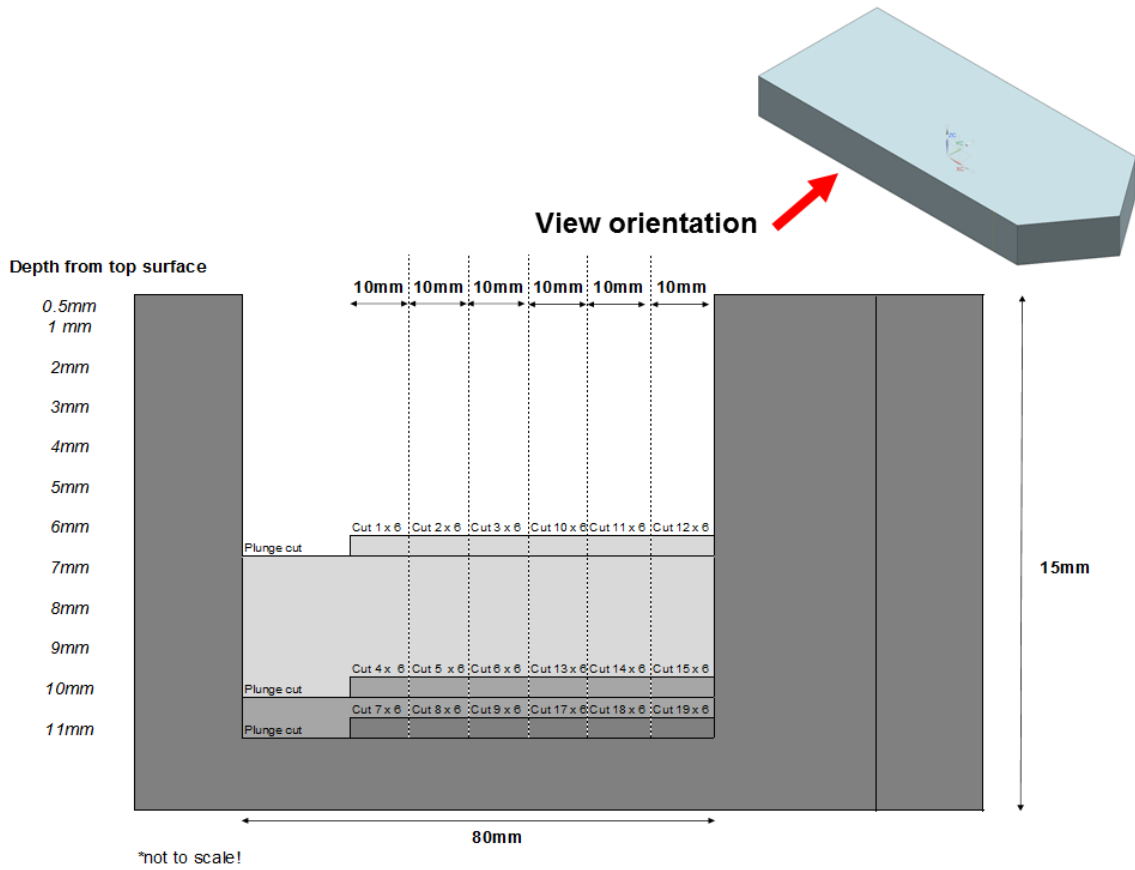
SCHEMATIC CROSS SECTION OF THE WORKPIECE WITH THE CUTTING STRATEGY.
